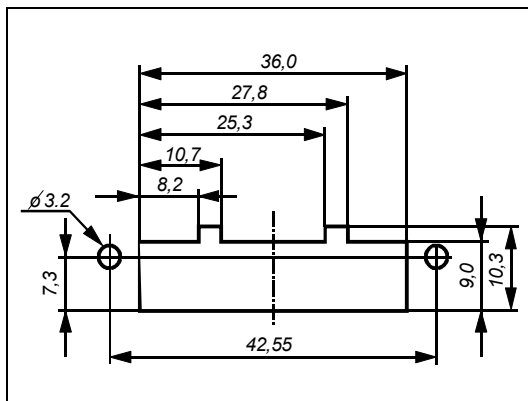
Recess in case panel for adapter boards with DeviceNet connector
